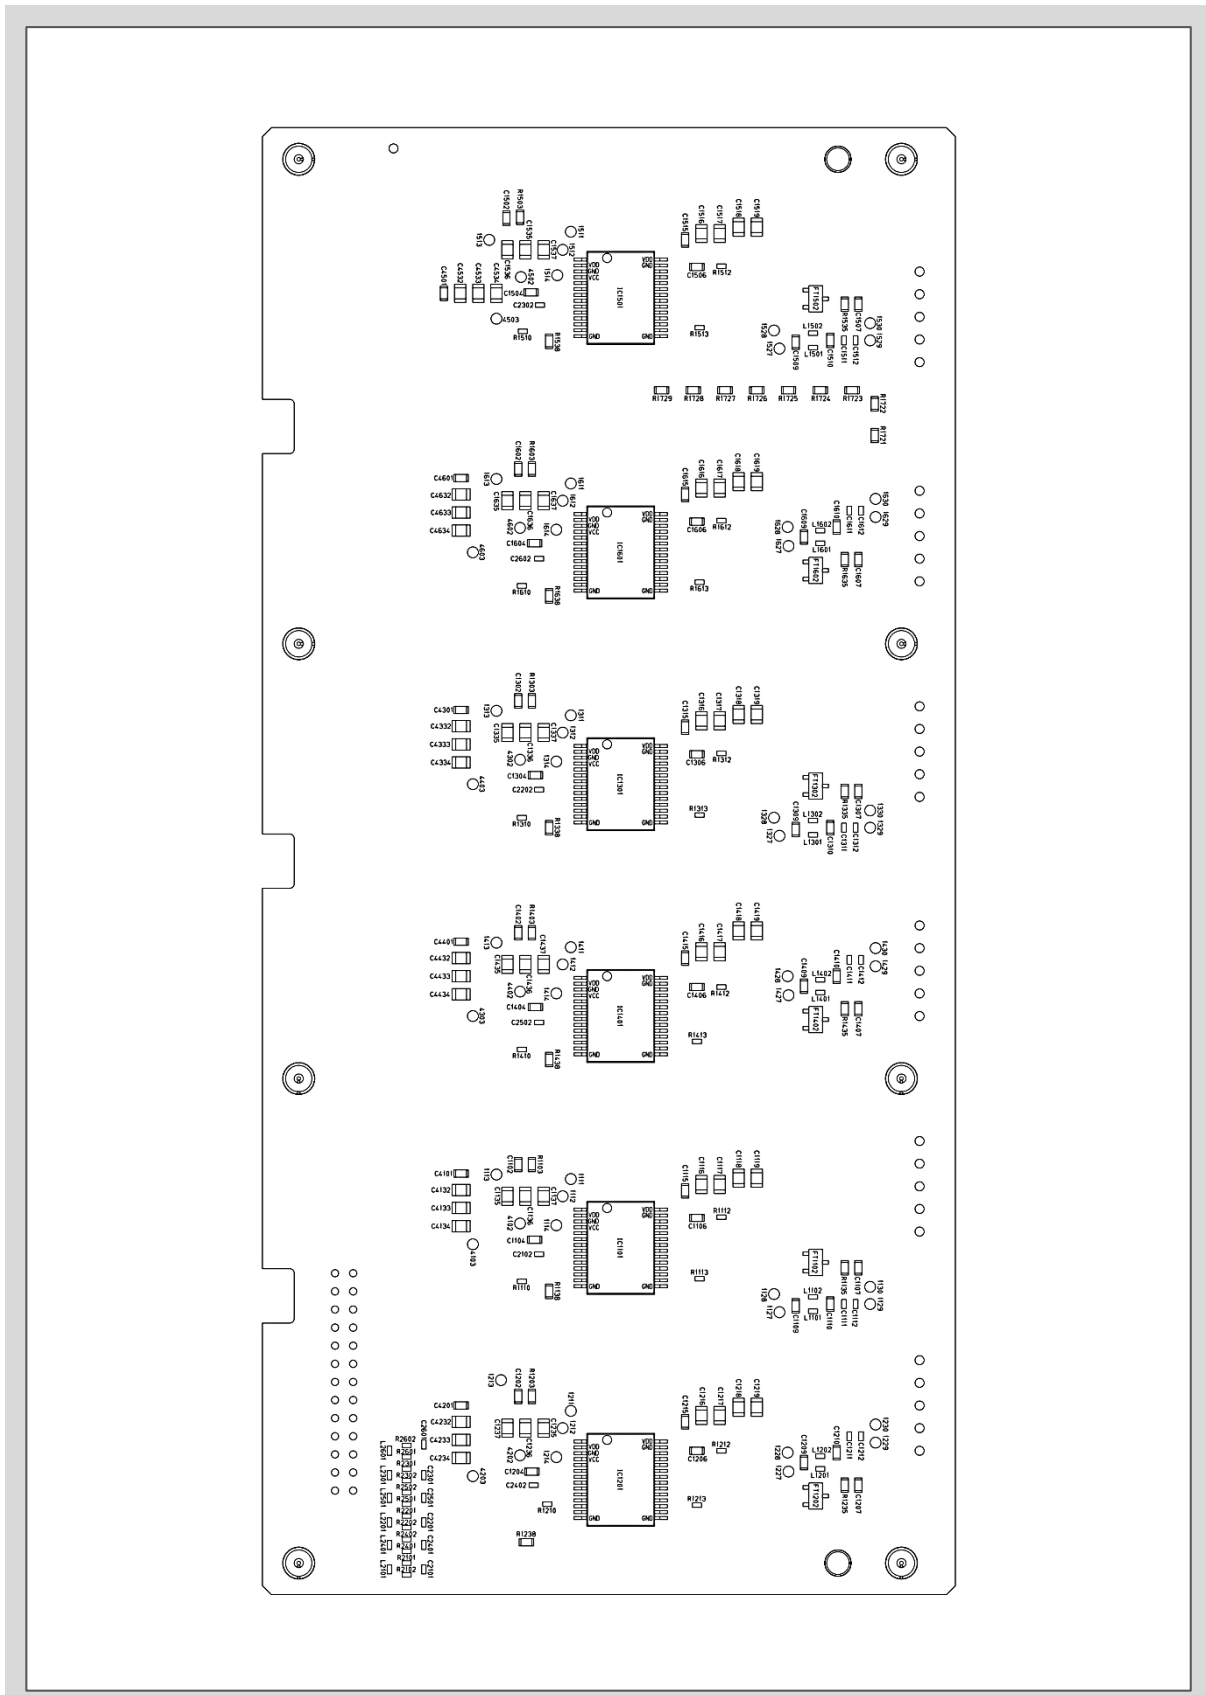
Assembly drawing of the driver board (Bottom)
